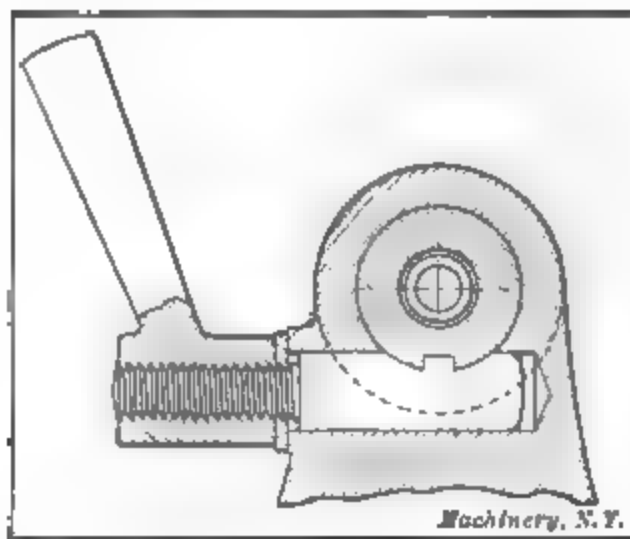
Clamping Bolt for Poppet or Tailstock Spindle
